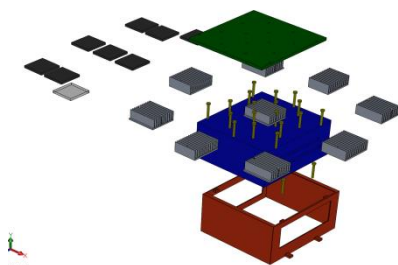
Exploded View Concept Assembly Aluminum plate and TEG configuration
